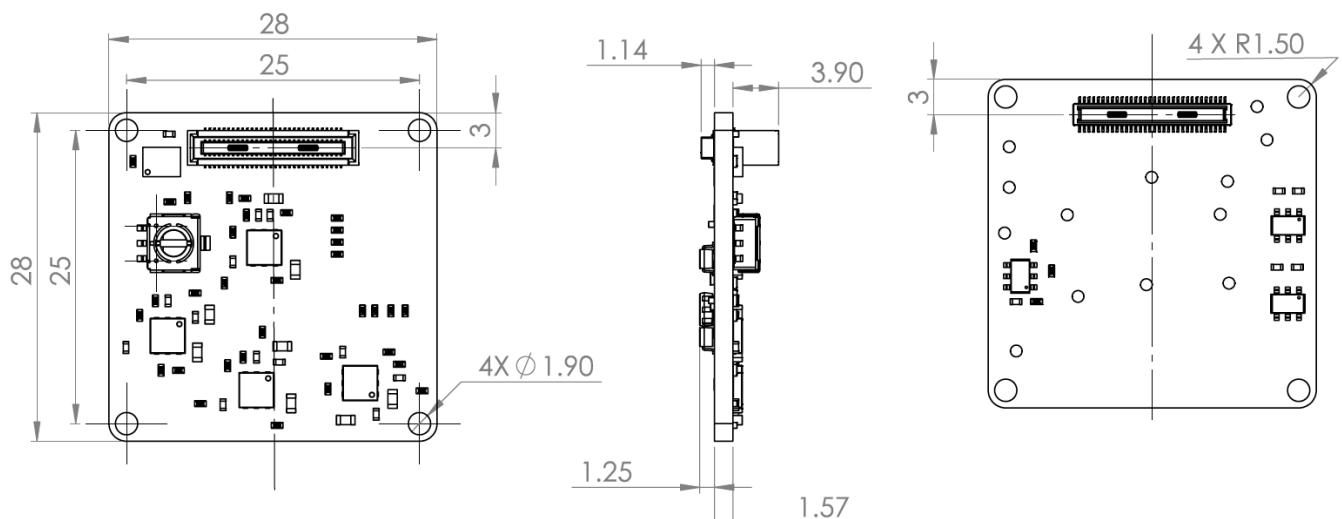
Technical Drawing of FSA-FTx/BC-V1
